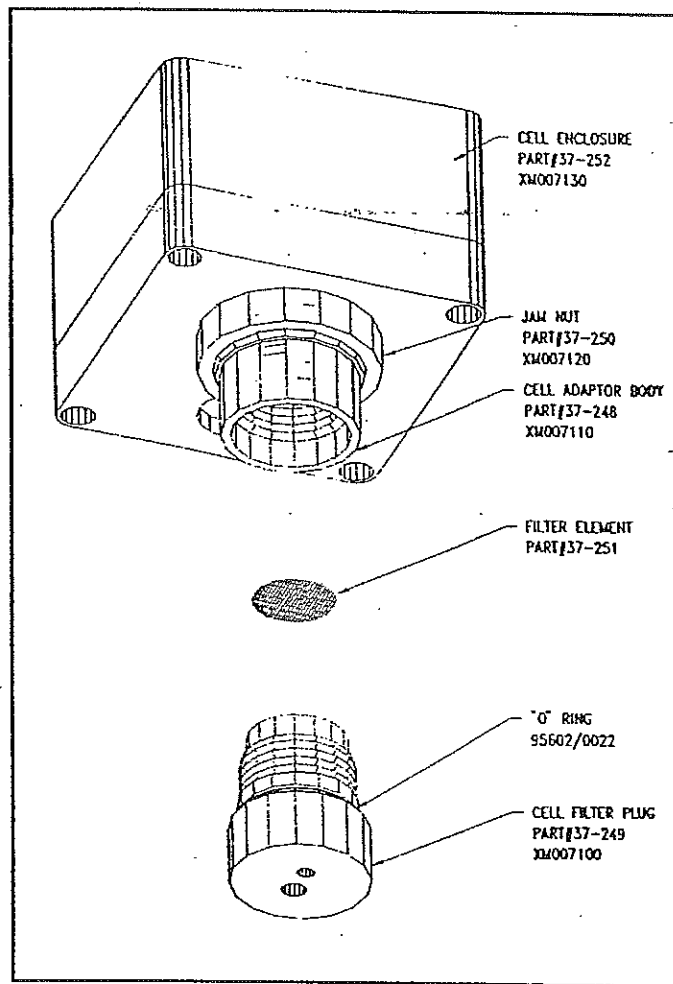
CO MONITOR FILTER HOUSING PARTS
